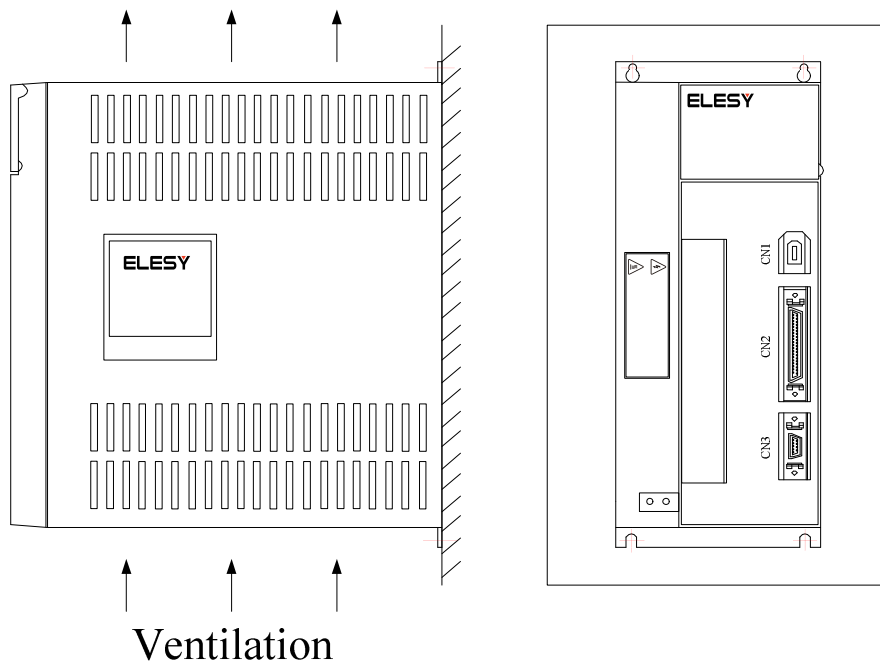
the driver's structure and installation dimension (unit: mm)
